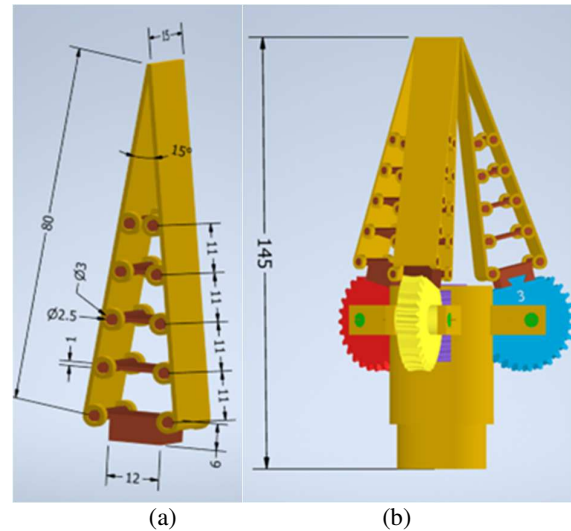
Design of a finray jaw with dimensions (a); whole gripper (b) (dimensions in mm)
